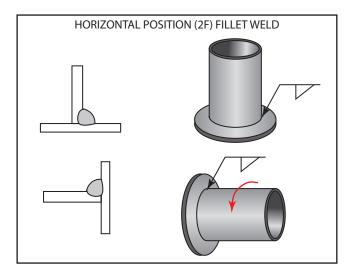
The two possible positions for a 2F horizontal fillet weld.
